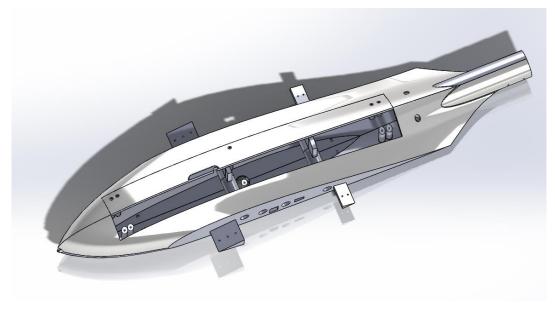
Final CAD of the fuselage. It shows the fuselage with half of the cap removed.
